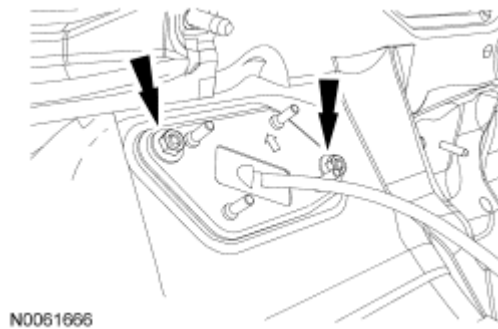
Locating Selector Lever Cable Grommet Nuts
